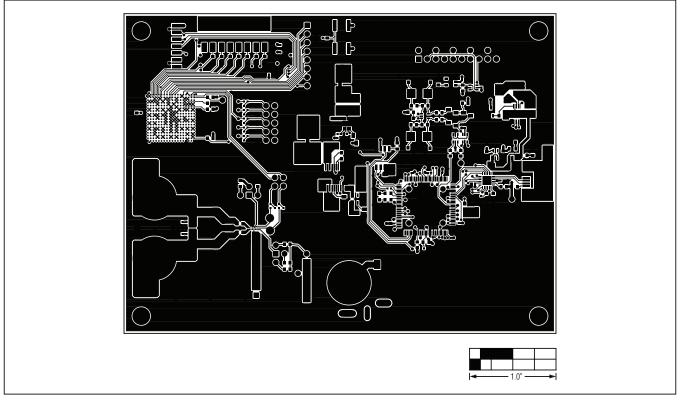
MAX98356 EV Kit PCB Layout—Component Side
